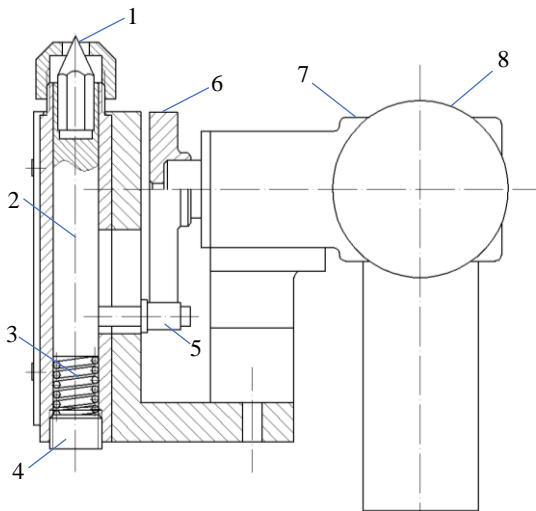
Scheme of the burnishing head: 1 - burnishing element, 2 – holder, 3 – spring, 4 – adjustment screw, 5 – holder lug, 6 – cam, 7 – gearbox, 8 – motor (Gałda L., Koszela W., 2018)
